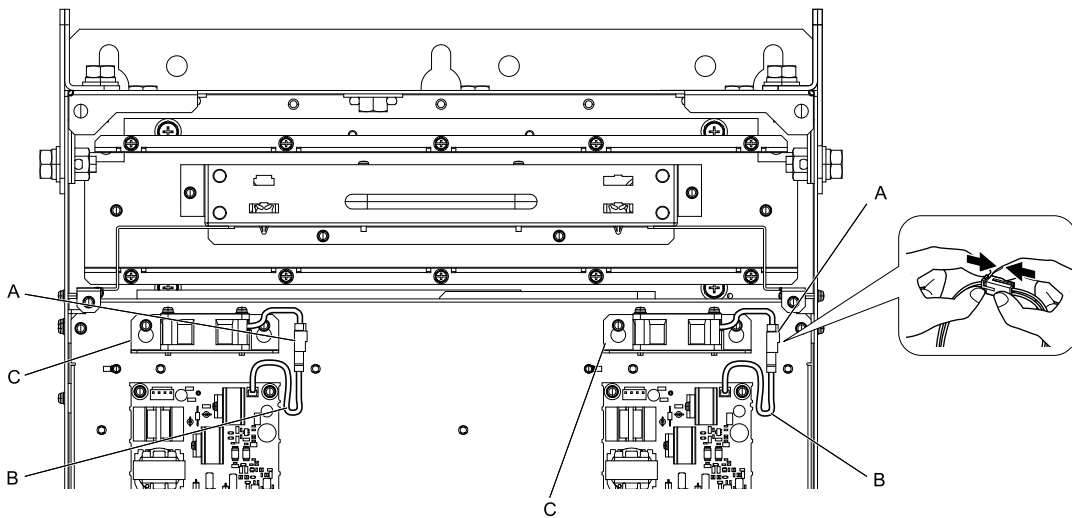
Install the Circuit Board Cooling Fan Unit
